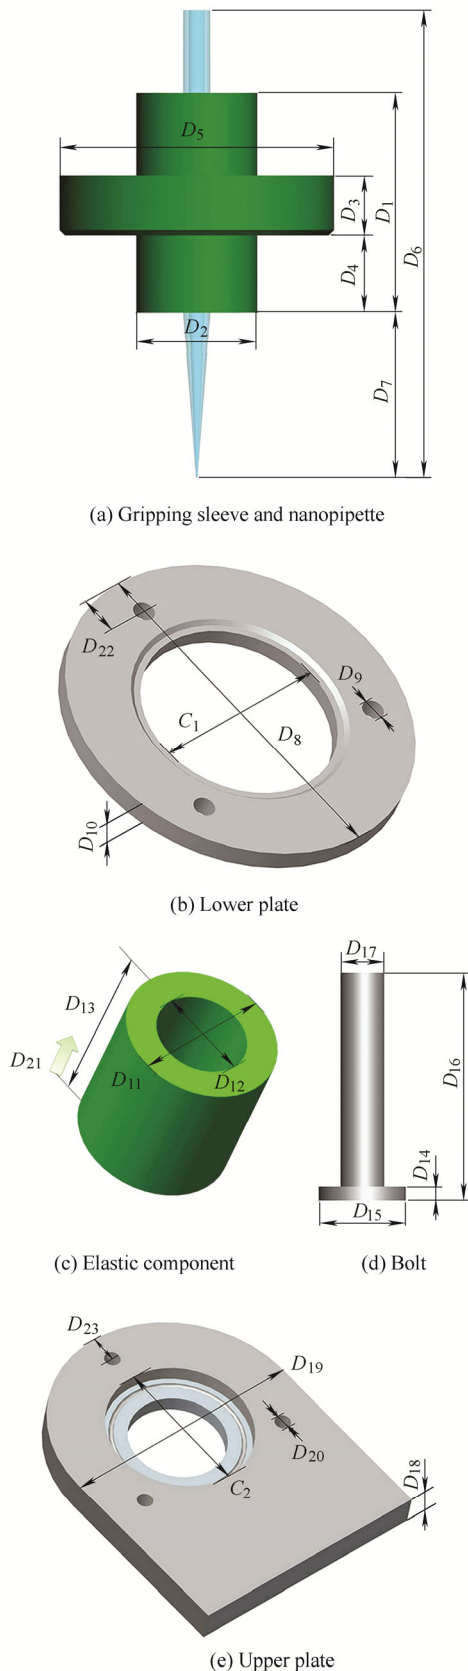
Schemes of the key dimensions for each component of the SICM probe
